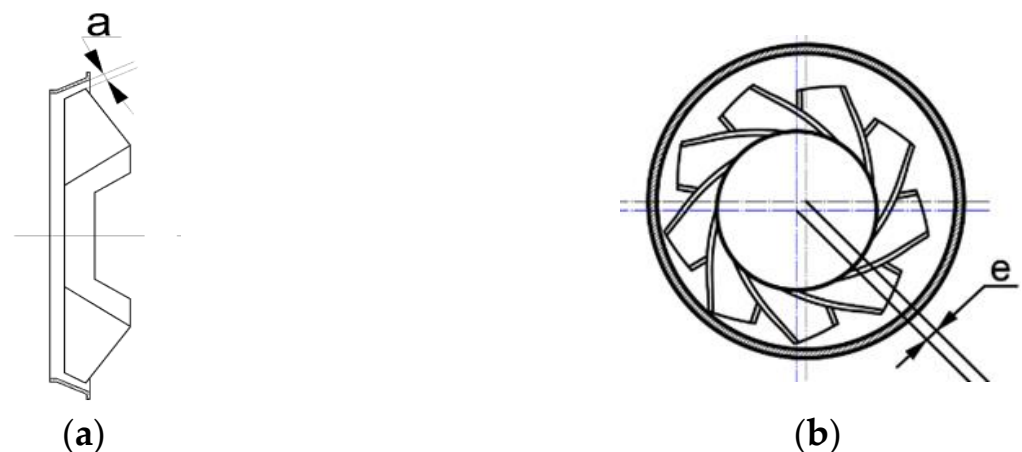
Schematic diagram of tip clearance and impeller eccentricity: (a) tip clearance; (b) impeller eccentricity.
